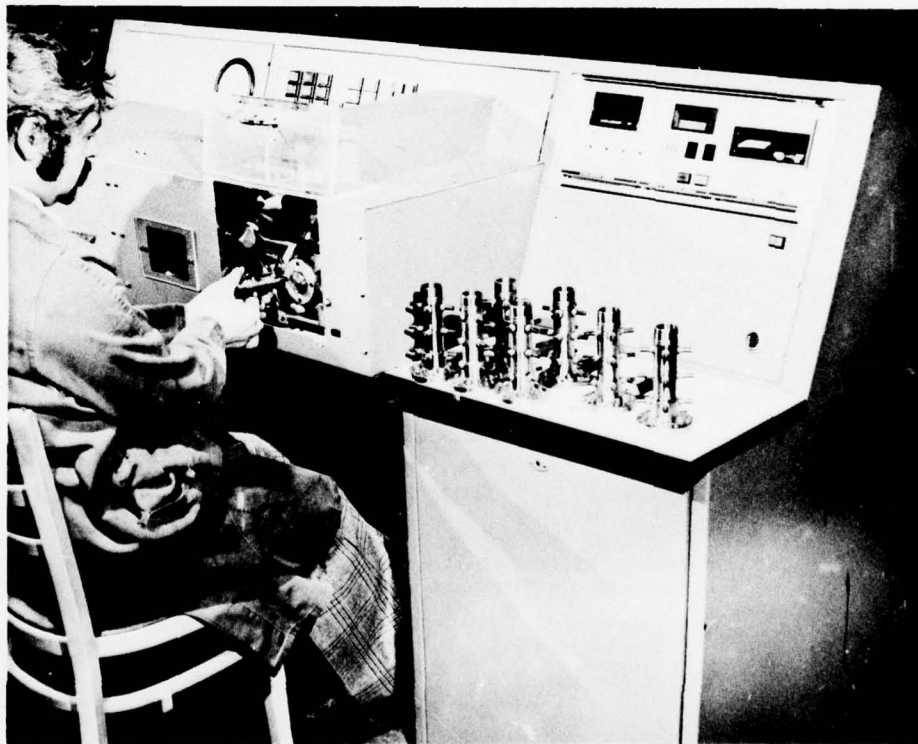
Special friction welder developed for manufacturing the component shown in Fig. 12.
